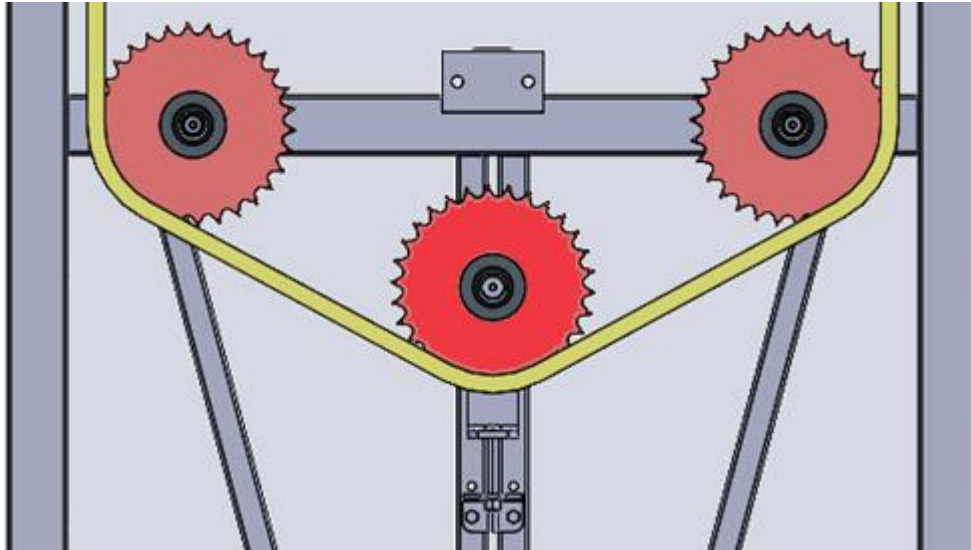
SPROCKETS AT LOWER AREA OF CHAIN, WITH GUIDE TRACKS AND SPROCKET HOUSING HIDDEN.
